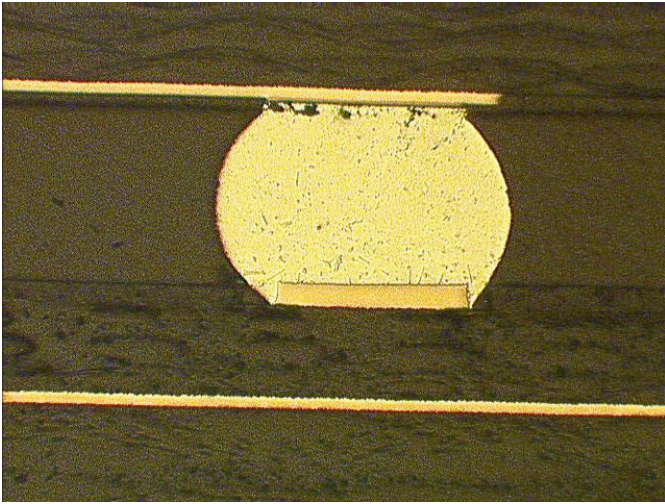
PBGA-225 Solder Joints, Board 104, Component U21, SN100C/SAC405, Failed @ 3812 Cycles
